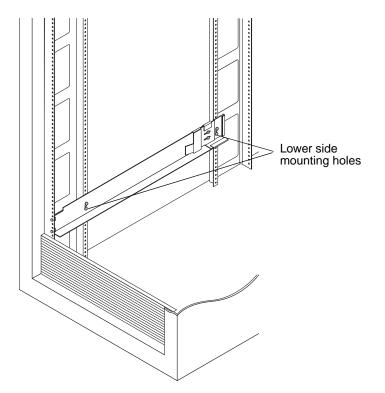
Inserting Screws in the Lower Side Mounting Holes of the Cabinet
